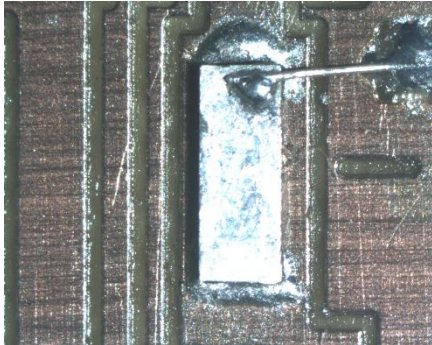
Test 3: Adding flux and modifying the reflow profile of the solder oven resulted in more reproducible soldering using the solder paste NC254. The solder paste wetted the piezo and PCB well which results in higher quality solders than previously (compare figure 42).
